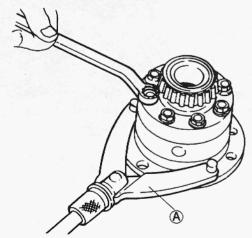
(A) Special tool (Rotor holder 09930-40113)
